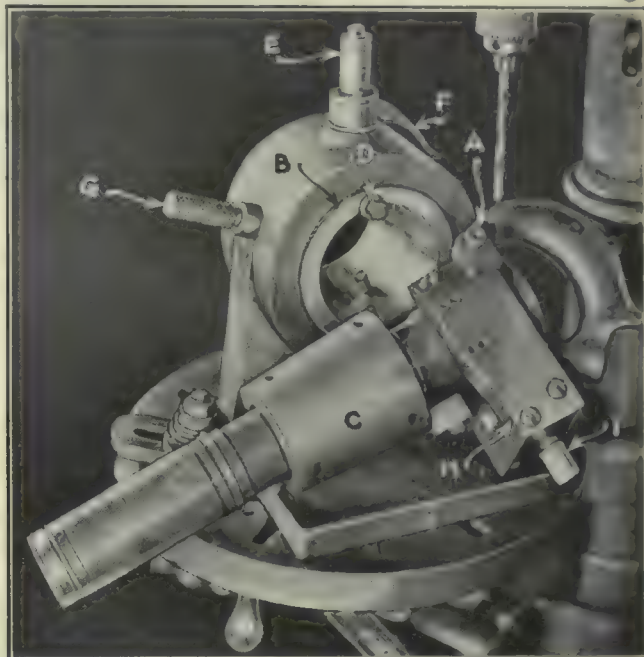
INDEXING JIG FOR DRILLING AIR HAMMER HANDLE
